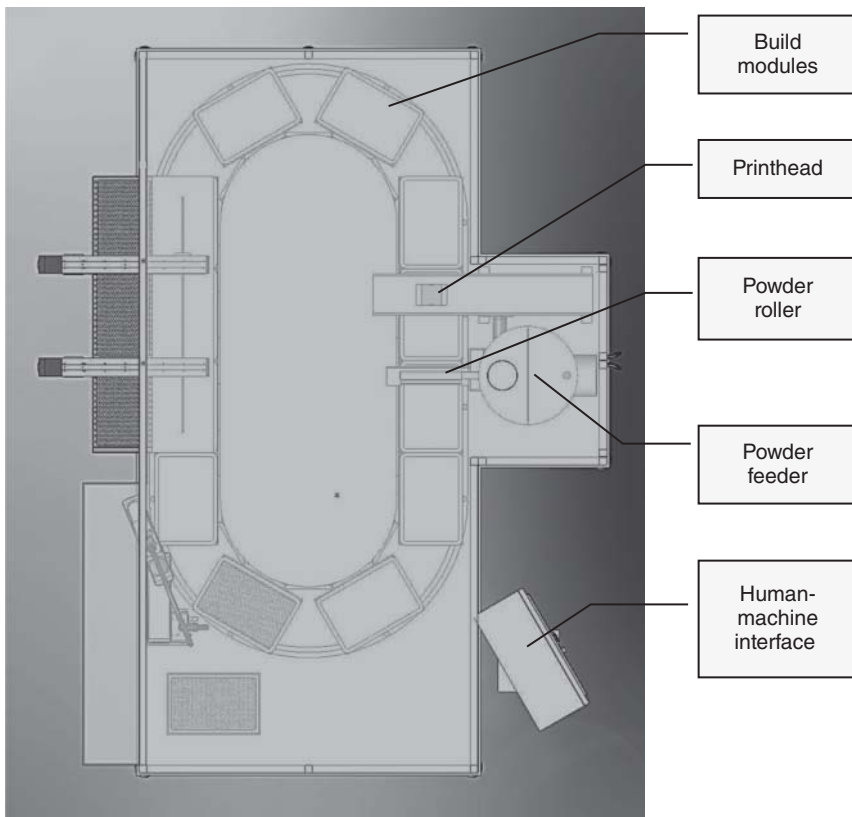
Top view schematic of Aprecia's "M0" 3D printing machine.
